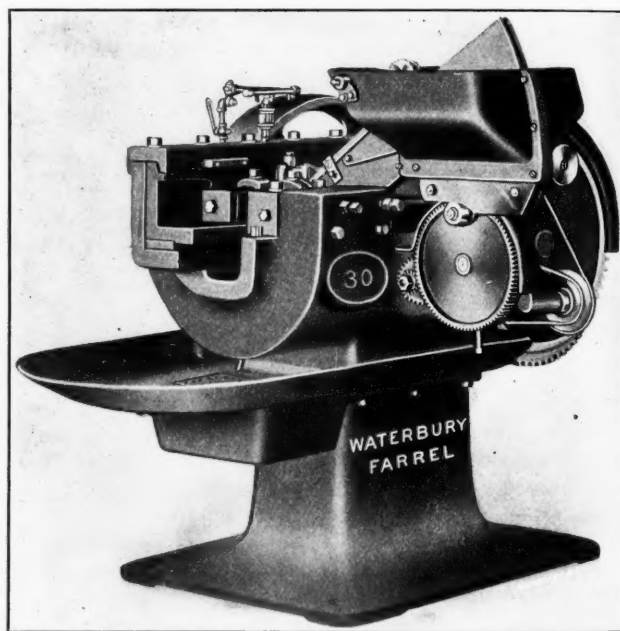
A Waterbury Farrel Foundry & Machine Co.'s Thread Rolling Machine with Automatic Hopper Mechanism
